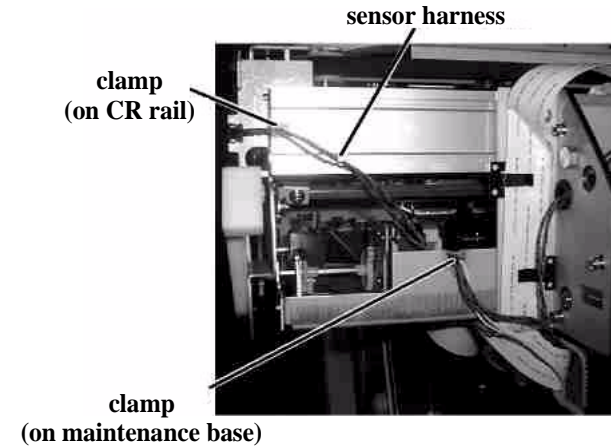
Removing the HEAD\_SLIDE Sensor Assembly-2
